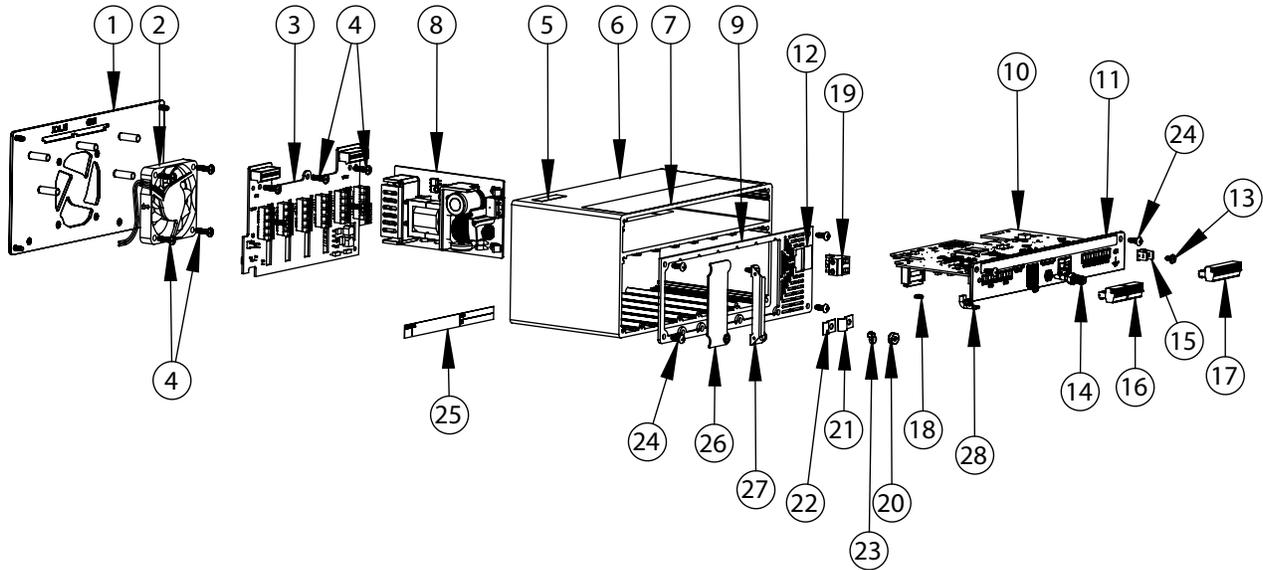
Replacement Parts Drawing - Controller Assembly
